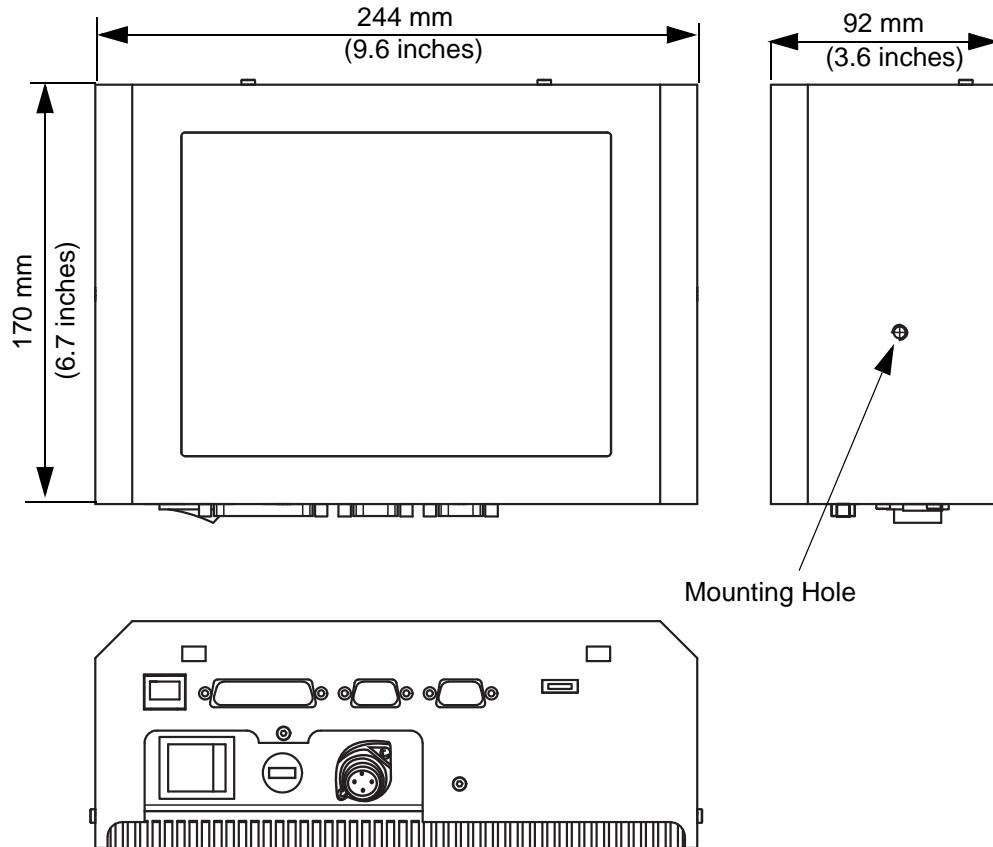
Standard CLARiTY® Controller -Mounting Hole
